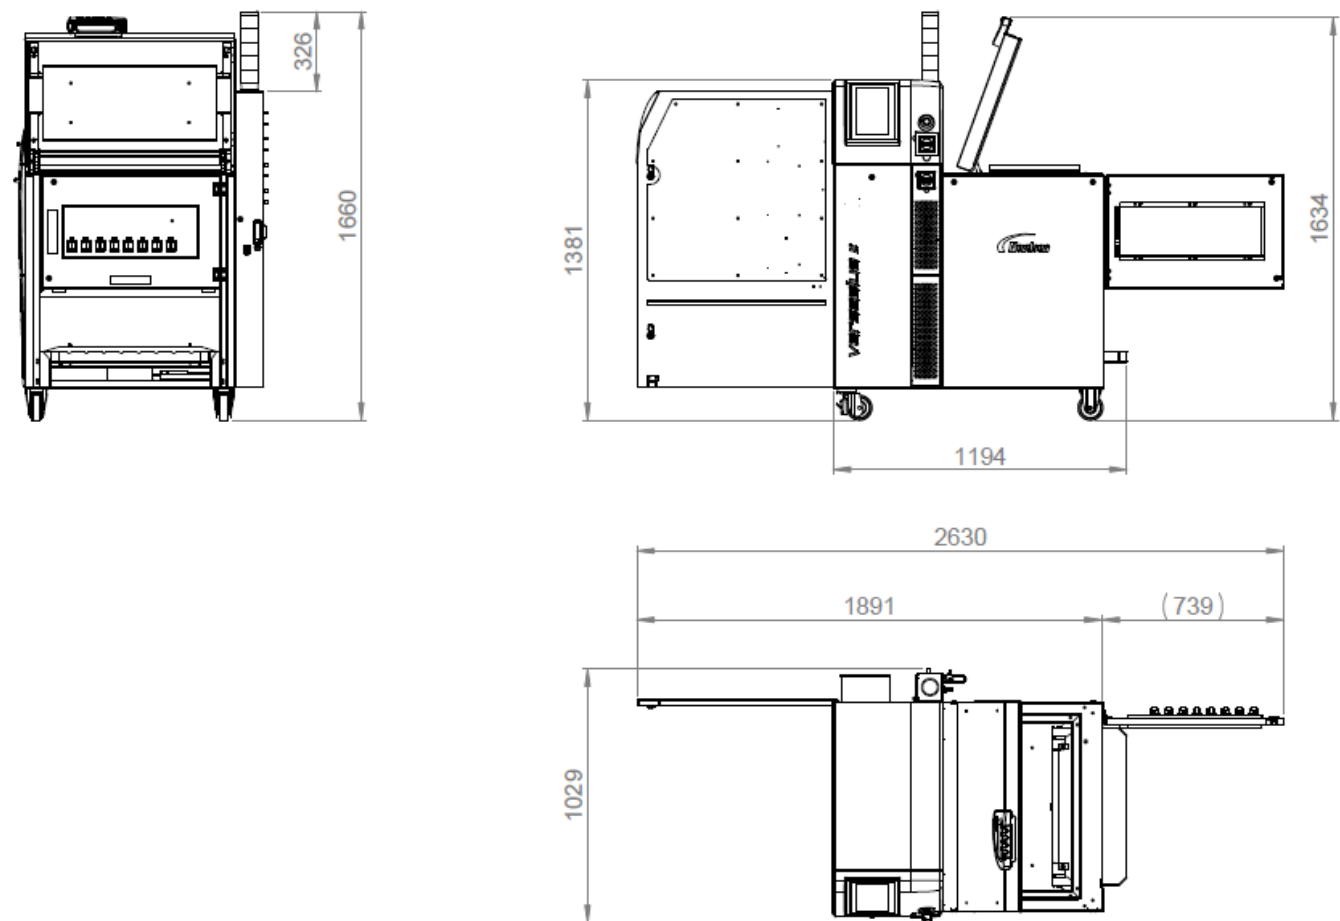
Melters D and E: Outer dimensions, side view, front view and top view
